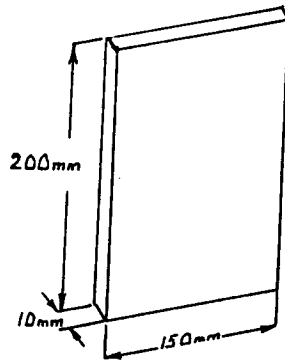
Construct the indicator board as shown in Fig. 2. Nail and glue the board centrally to one edge of the base. Glue the sheet of white paper to the face of the indicator board.
